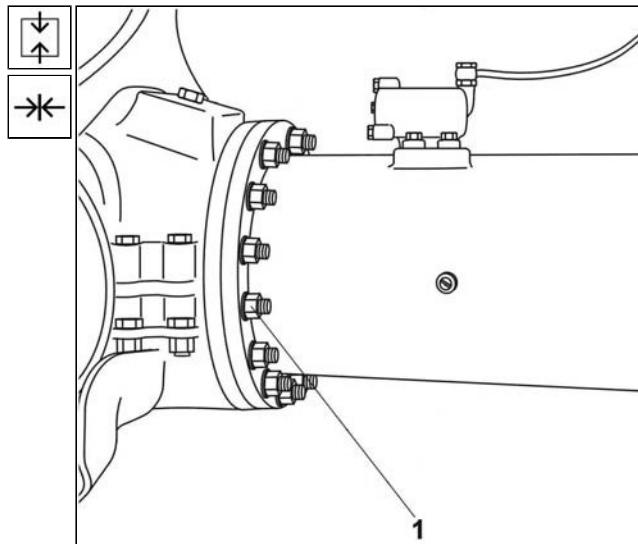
Connection of 2nd rear axle and connecting part - installation
